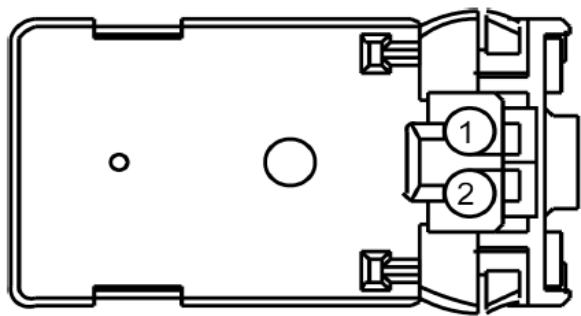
Passenger Air Bag Module Connector End View (C256A)
